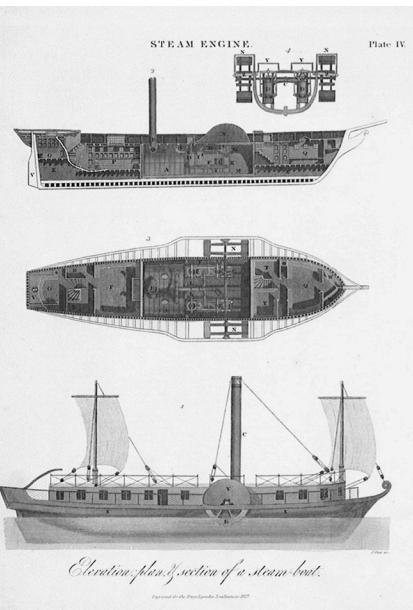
Engraving of the elevation plan and section of a steam-boat, 1827. ©Wikimedia Commons.²³
